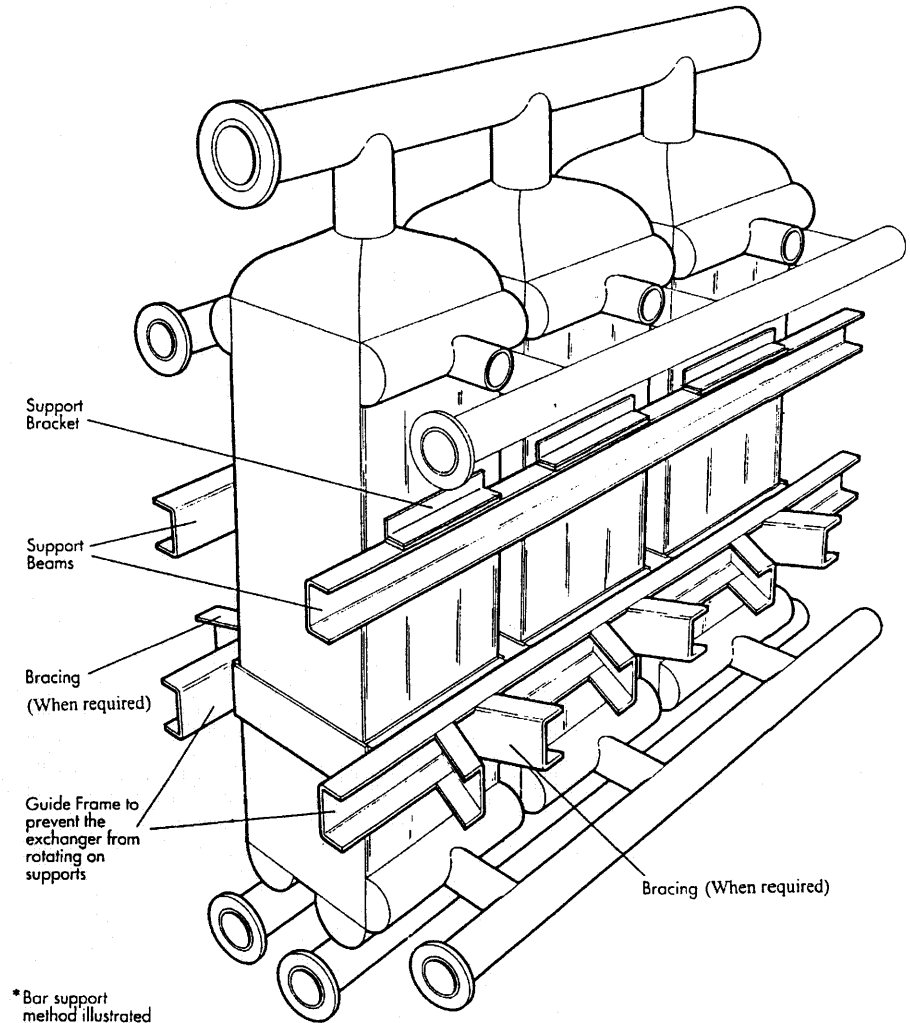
Typical Heat Exchanger Assembly of Three Cores Showing Angle Bracket Supports
